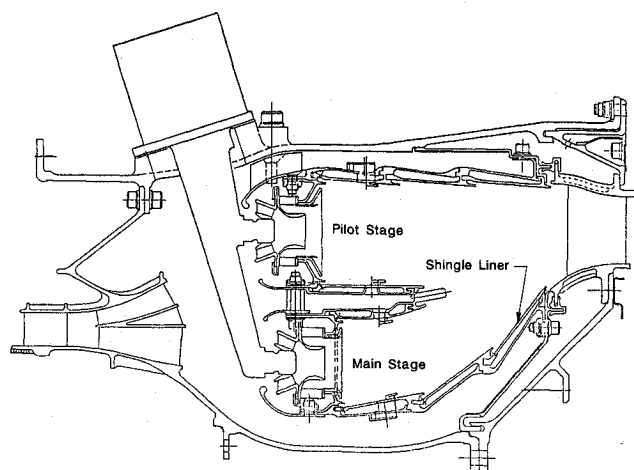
Cross-sectional drawing of E³ dual annular combustor.
